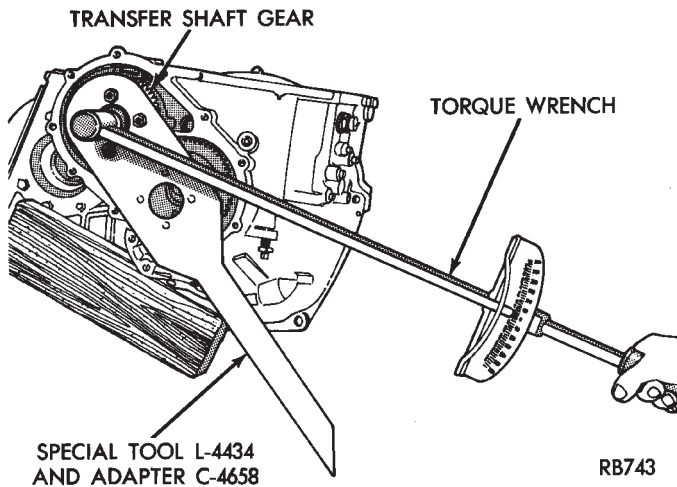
Tighten Transfer Shaft Gear Retaining Nut to 271 N·m (200 ft. lbs.)
